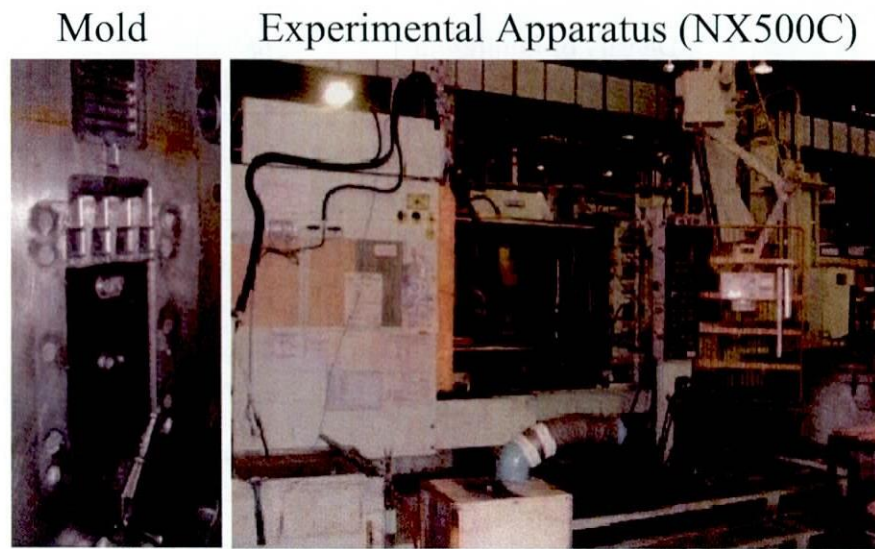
Picture of the cold chamber die casting machine and the mold
